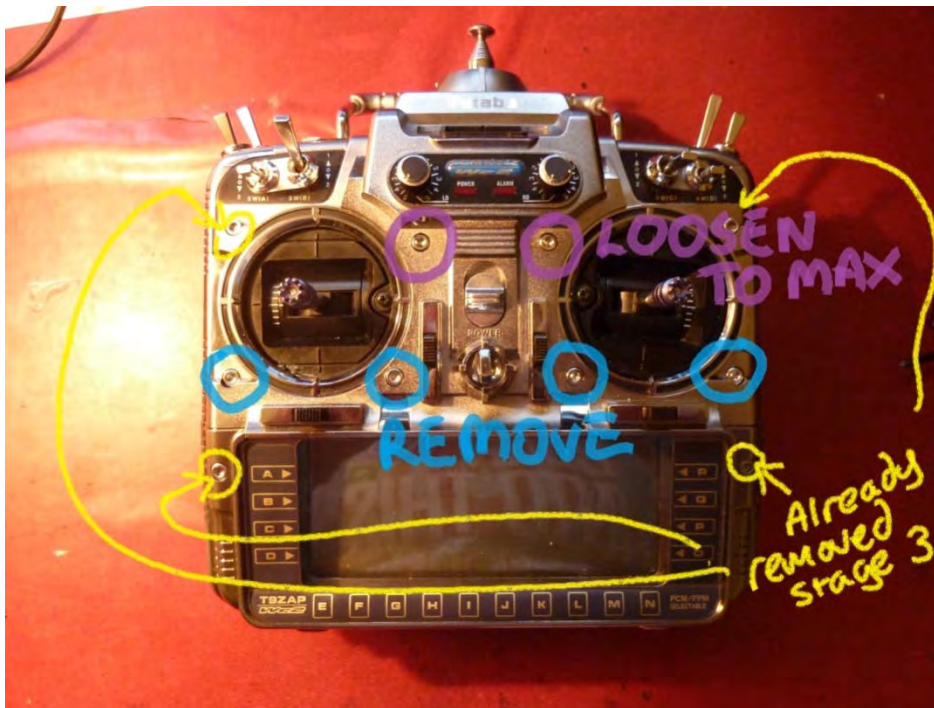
Remove and loosen these screws (note those already removed in Stage 3, if they are still present remove them)
